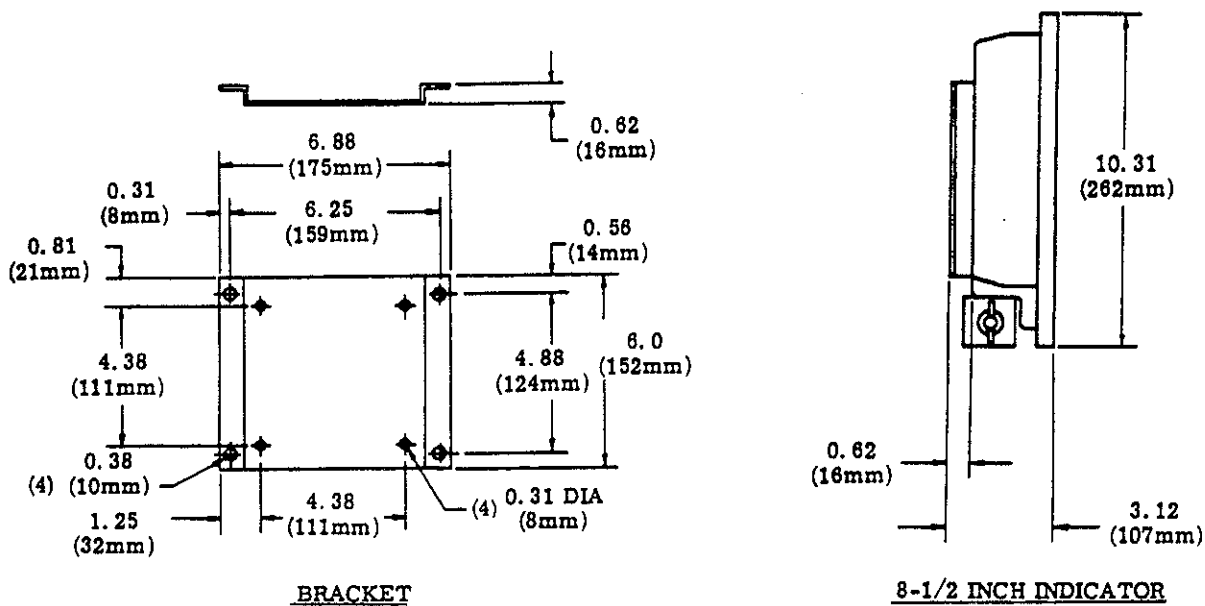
Overall Dimensions for 8-1/2-Inch Indicator and Bracket.
